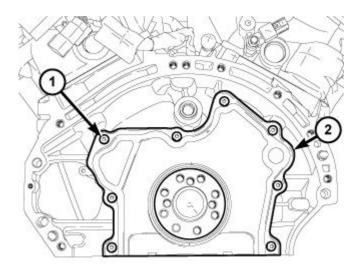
Seal Retainer & Attaching Screws Courtesy of CHRYSLER GROUP, LLC
